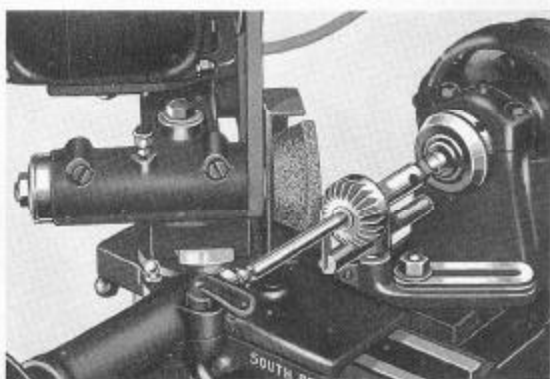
Sharpening a Valve Seat Reamer in the Lathe. Valve seat reamers of any angle, valve seat counterboring cutters, valve guide reamers, straight and taper reamers and adjustable reamers can be ground quickly and accurately in the Valve Grinding Lathe.
